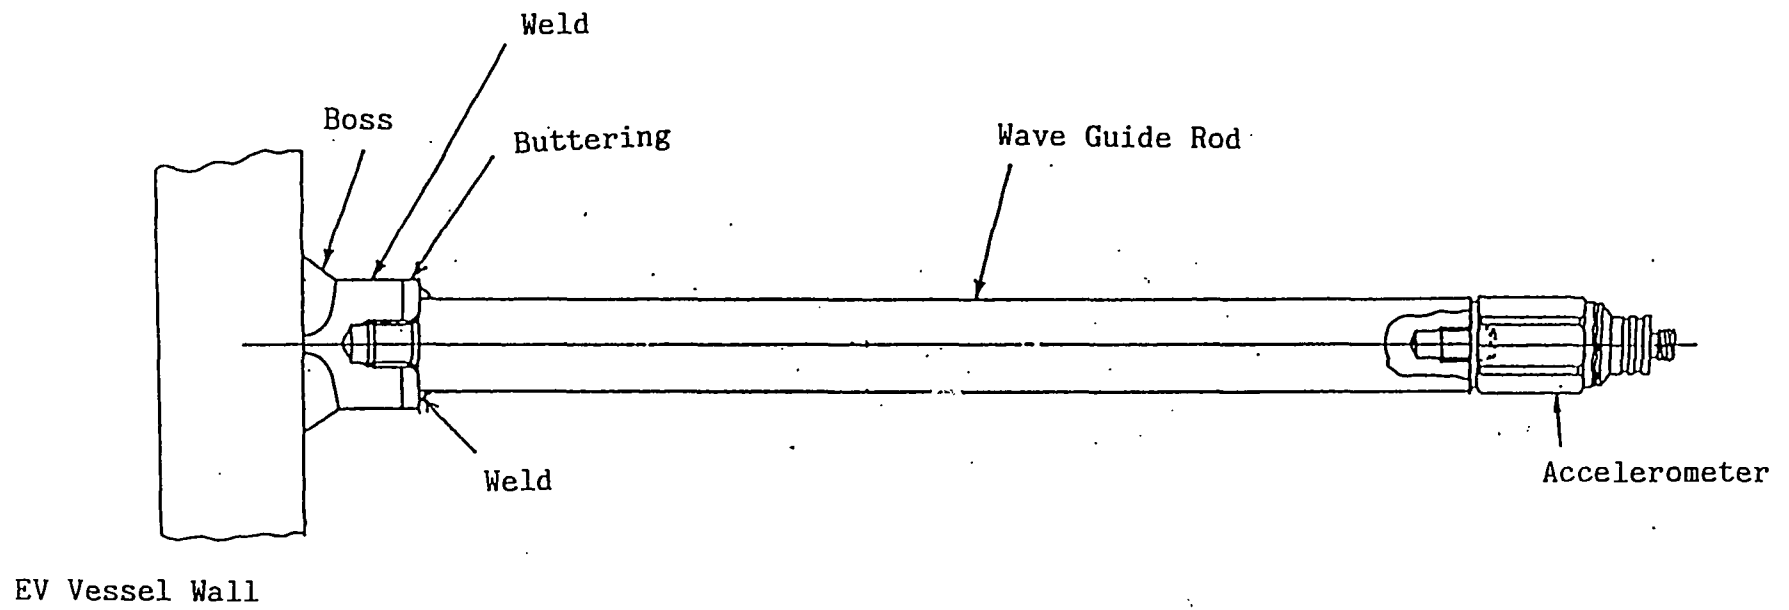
Wave Guide Rod Mounting on Monju Evaporator
